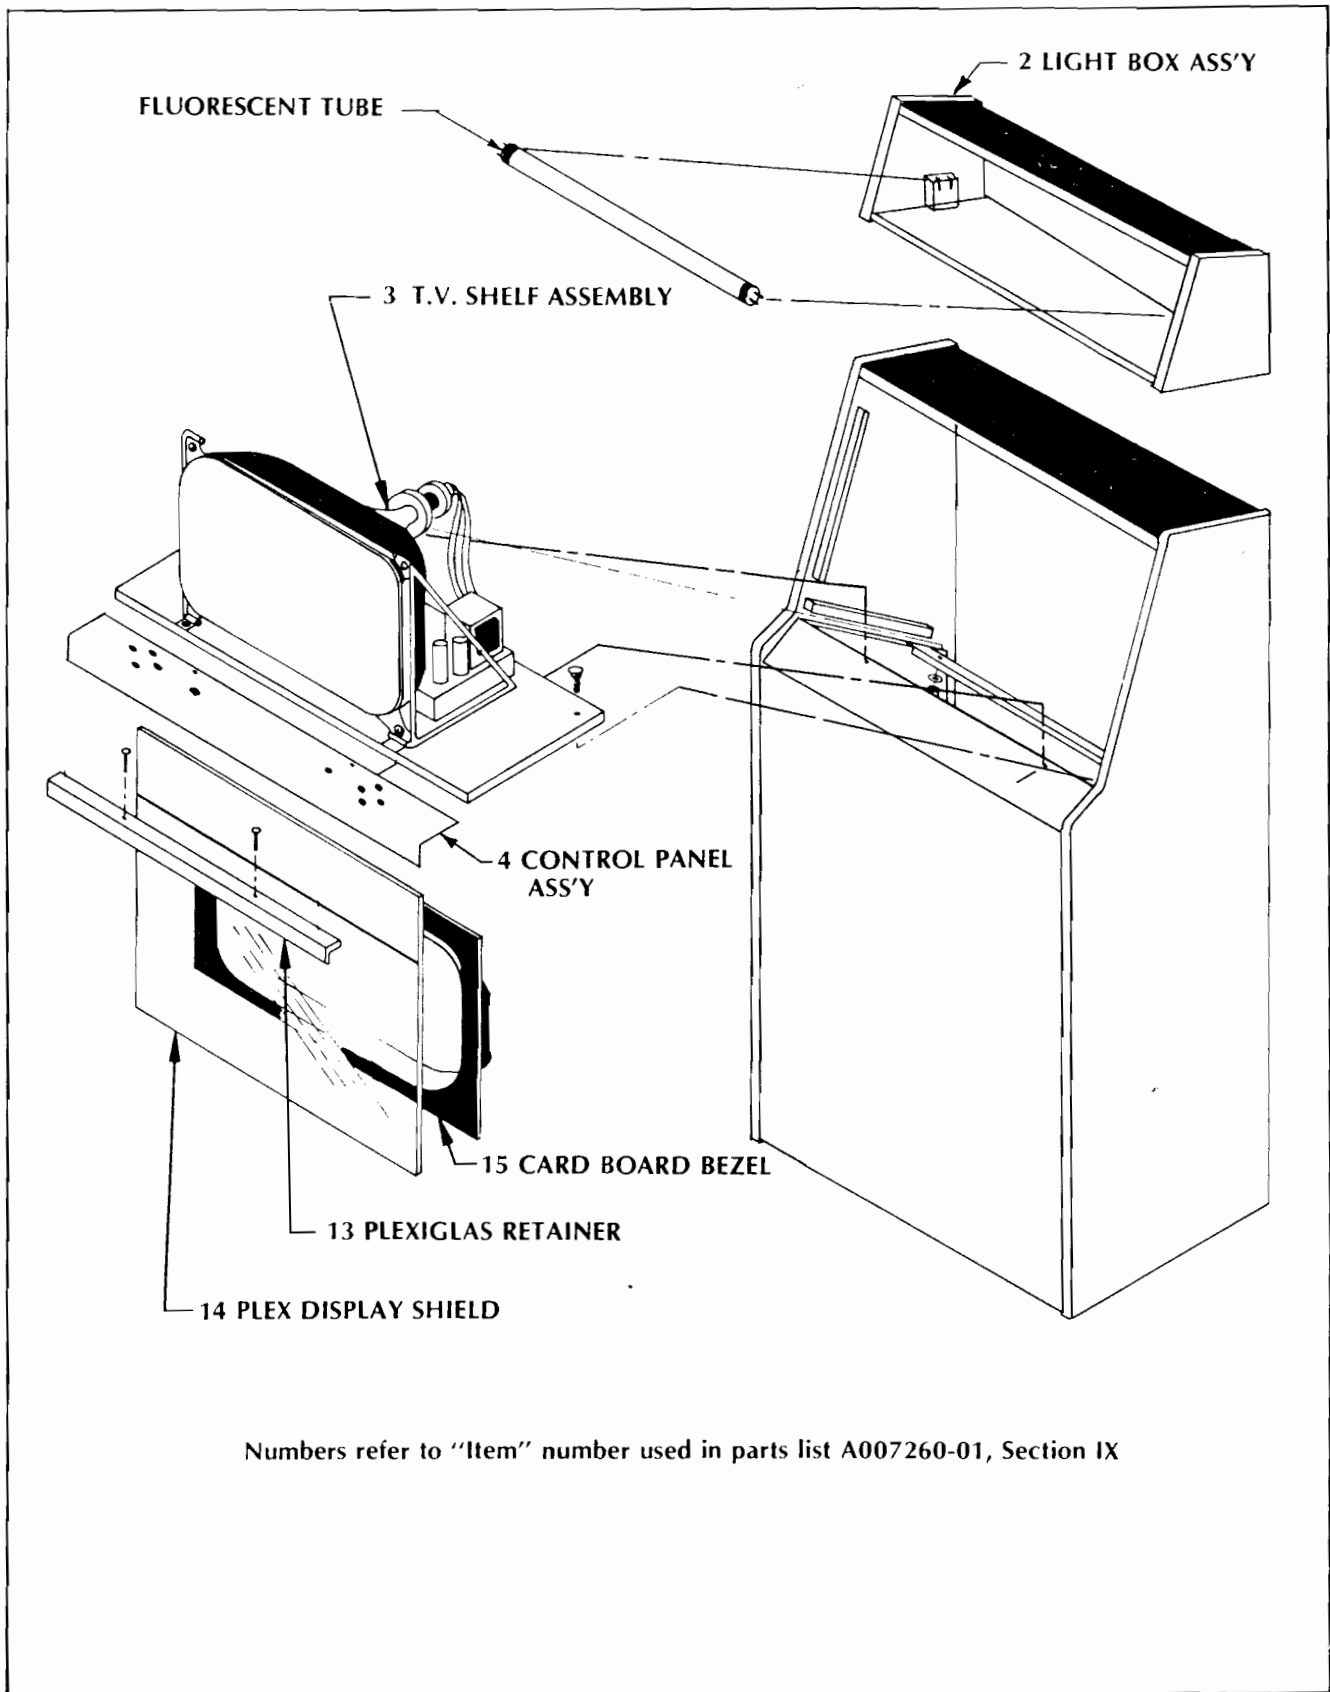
A Exploded Diagram, Front View (Upright Model Only)
